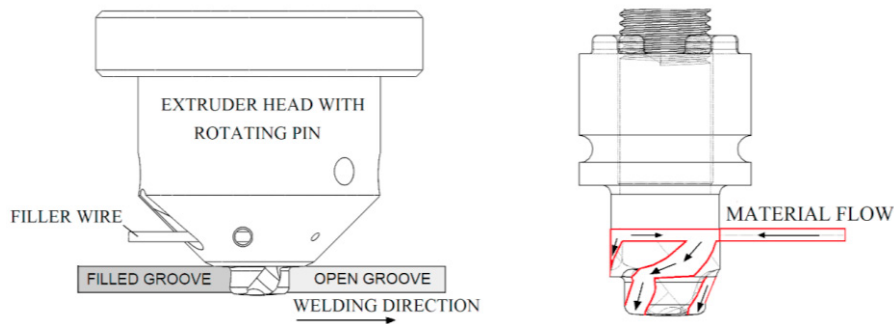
Schematic representations of the main HYB PinPoint extruder tool parts. Included is also a sketch of the flow behaviour of the FM inside the extrusion chamber and through the moving dies in the pin.
